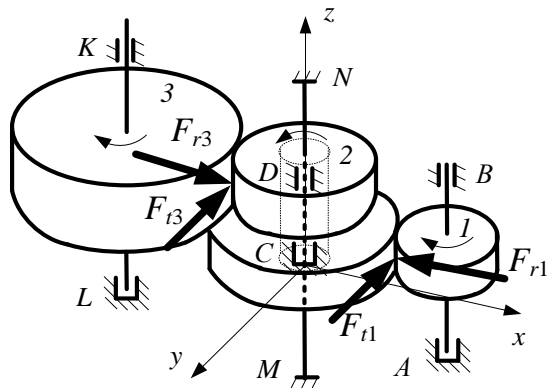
Calculation diagram of the vertical roller drive gearbox: leading 1 gear with movable supports A and B; intermediate 2nd gear with movable supports C and D and fixed supports M and N; output 3 gear with movable supports L and K; F_{r1} , F_{t1} and F_{r3} , F_{t3} respectively, radial and tangential forces in the engagement poles
